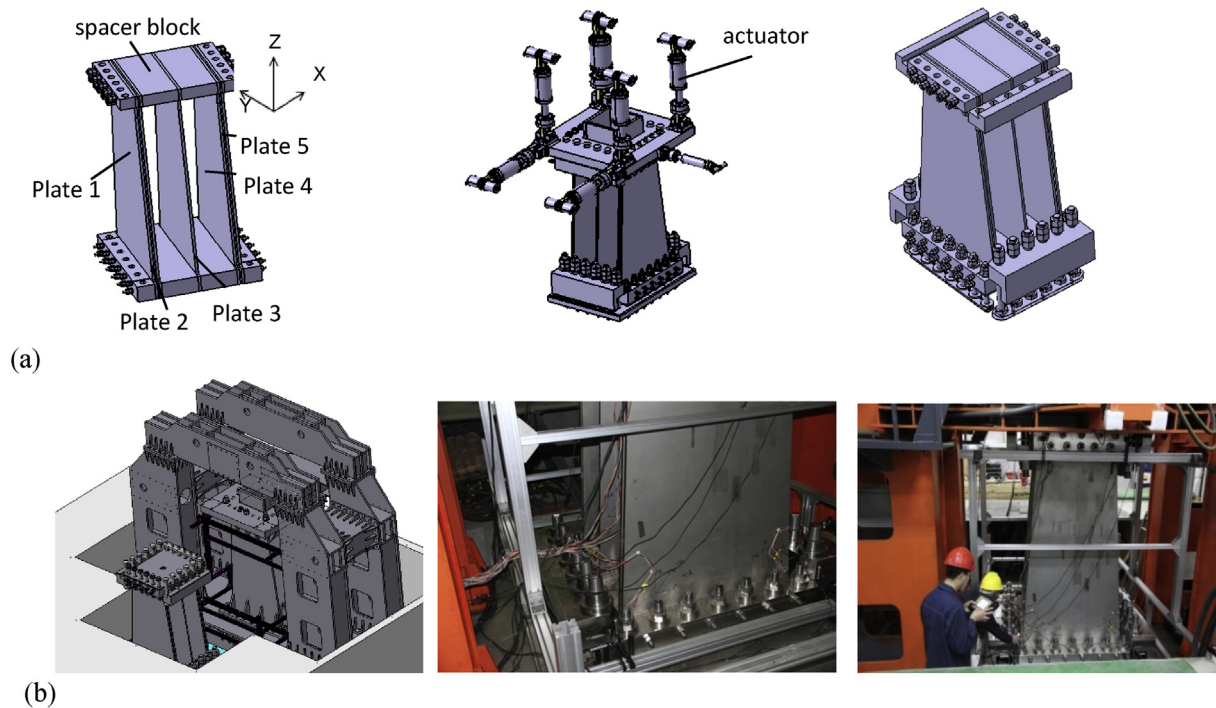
Schematic illustration of (a)GS mock-up and (b)multidimensional loading test.
